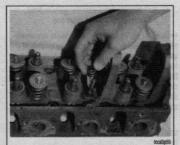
Remove the valve seal from the guide. Some gentle prying or pliers may help to remove stubborn ones
